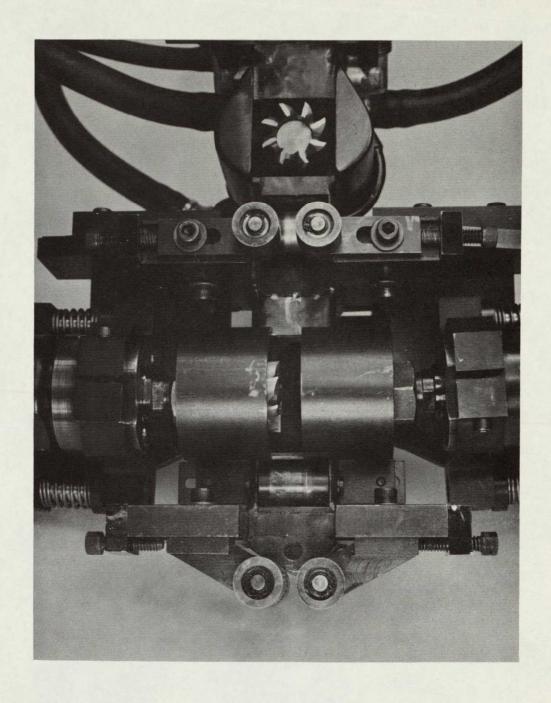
Bottom View of Modified Cutting Unit with Screw Adjustments for Alignment Rollers.
